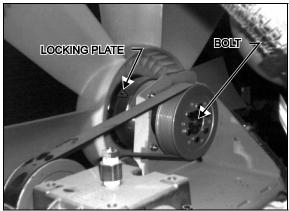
FAN-MECHANICAL LOCKING DEVICE 05033
